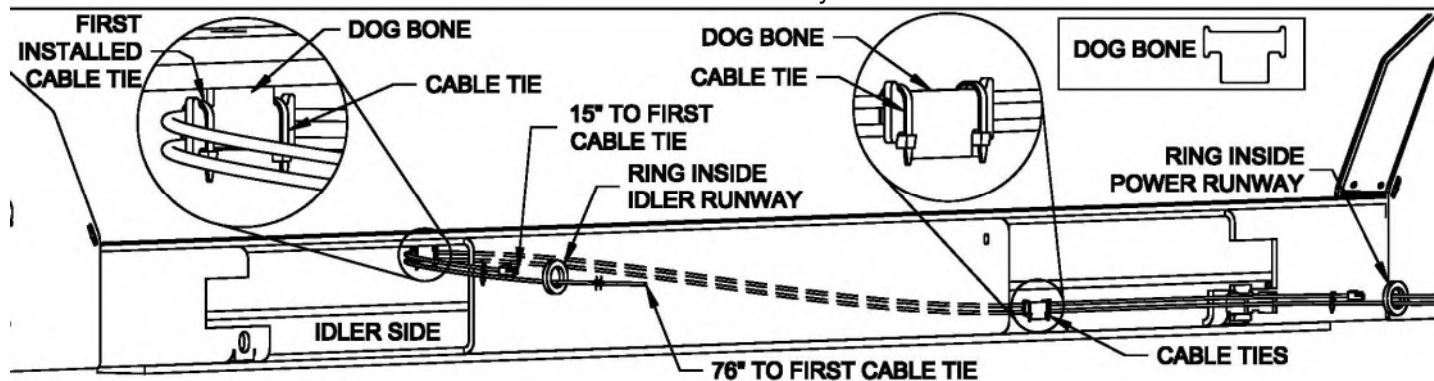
LIGHT & LOCKS Rear Crossbeam Air Line and Electrical Cable Routing
